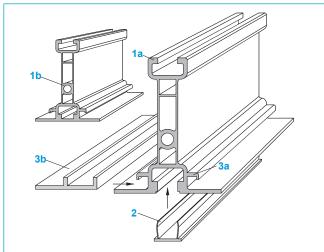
Lower right-hand corner: the UFR-55/70-T/E profile 1a with covering strip 2 and attachable bearing rail 3b; upper left-hand corner: the UFR-55/70-T/P profile 1b with concealed groove
